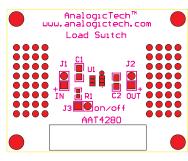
Evaluation board top side silk screen layout / assembly drawing
